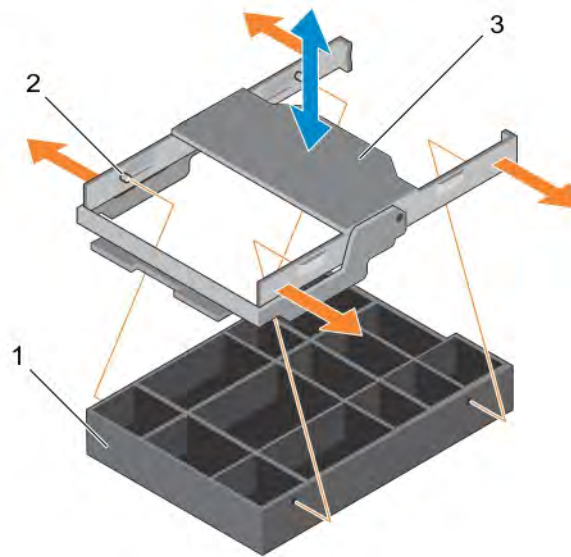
Removing and installing the hard drive blank from a hard drive carrier
